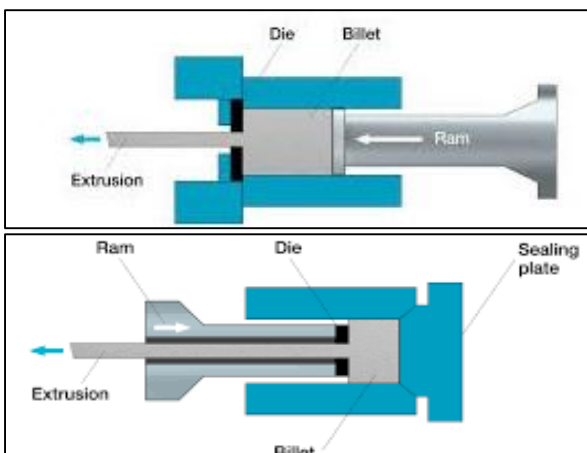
Direct extrusion Fig. 1.2: Indirect extrusion
